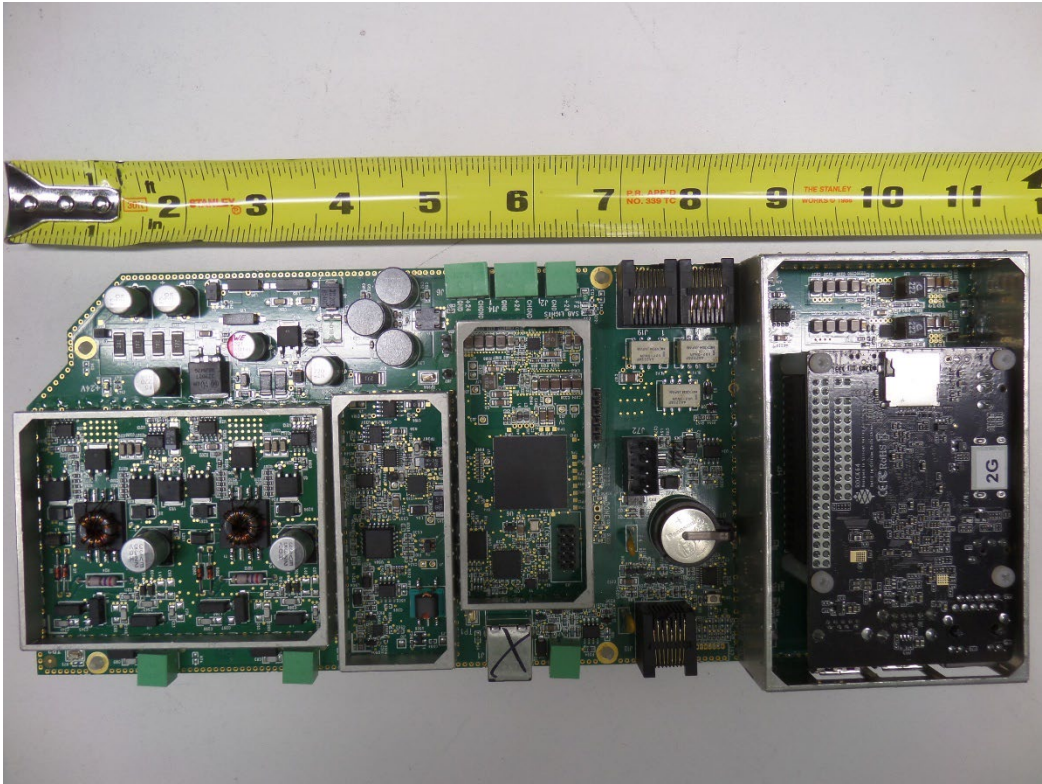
NP12 PRI/PAB LOWER BASE EAS RF BOARD TOP SIDE WITHOUT SHIELDS
